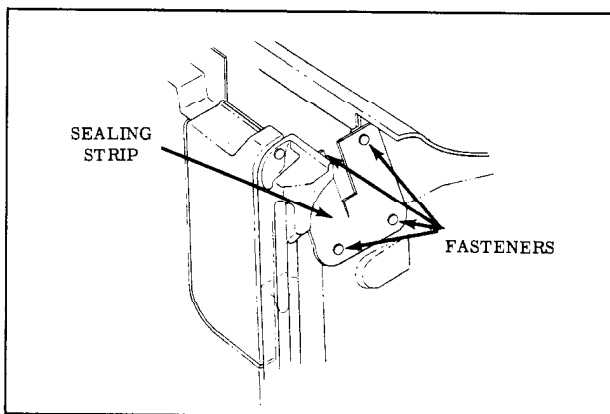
Front Door Lock Sealing Strip (at Belt)
